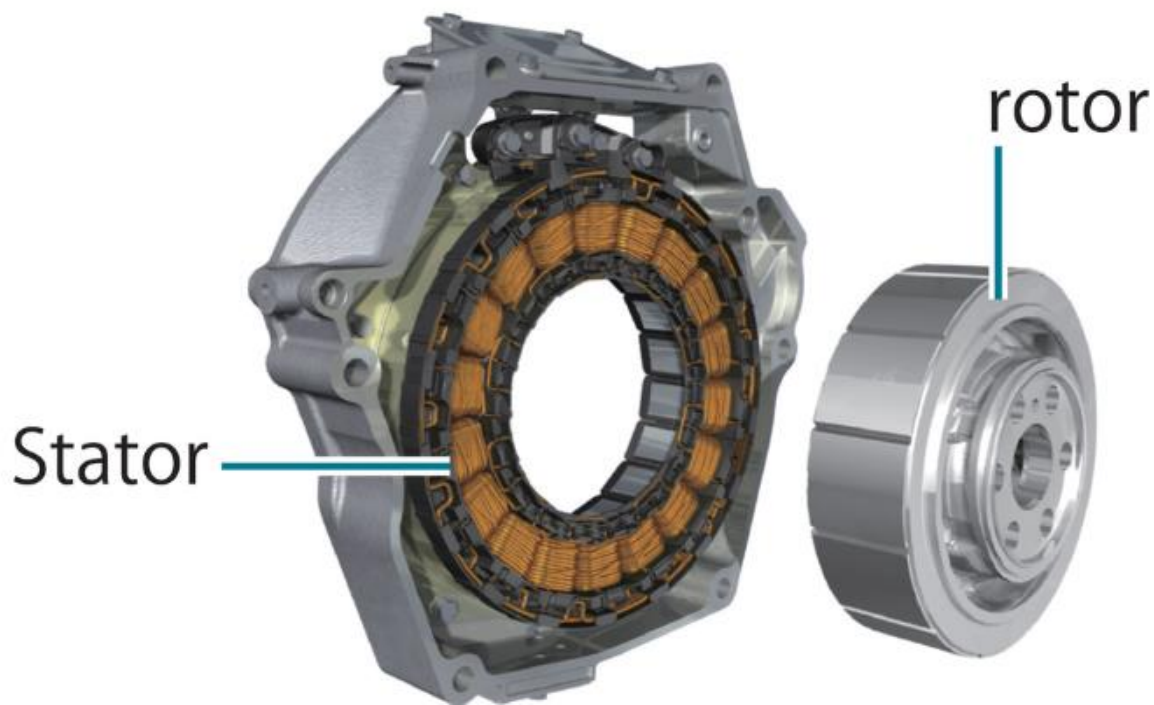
Expanded View of the IMA Motor Unit [88]
